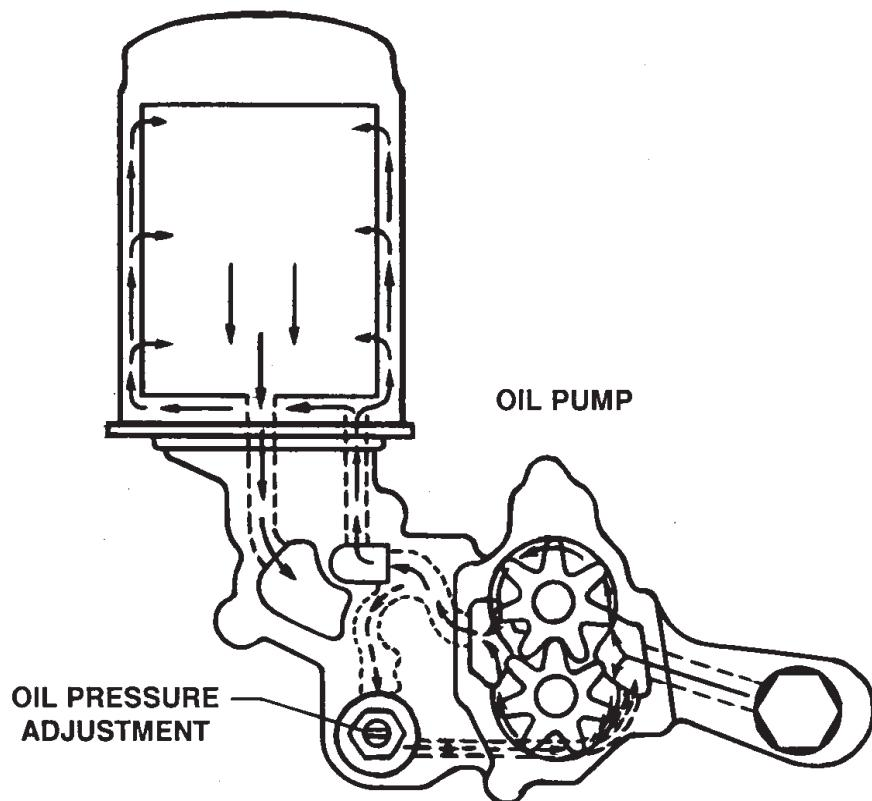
Oil Pressure Relief Valve Adjustment Screw
